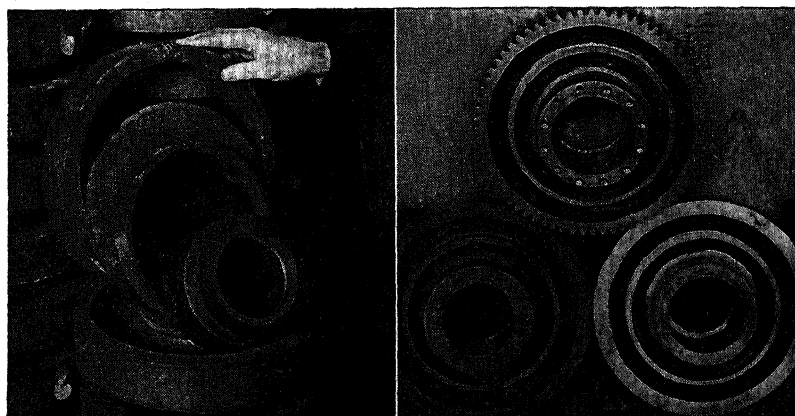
This application illustrates how steel of various chemical and physical properties can be combined by welding for greatest manufacturing and service economy. Left: Component parts for a spur gear blank. Hub and oil ring in foreground, subjected to abrasion in service, are made from medium carbon steel. For maximum strength, the web is made from high tensile steel. To facilitate cutting of teeth the rim is made from mild steel and later case hardened. Right: Rough gear blank is shown at the lower left and next to it the machined blank. On top is the completed gear.
